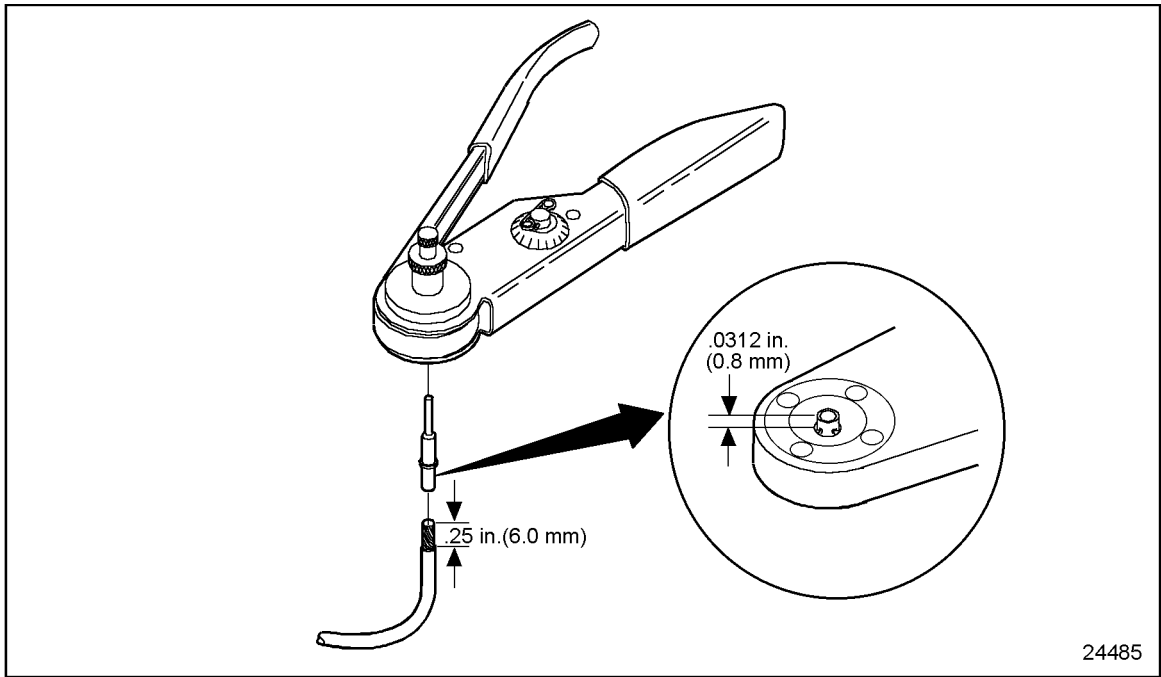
Setting Wire Gage Selector and Positioning the Contact
